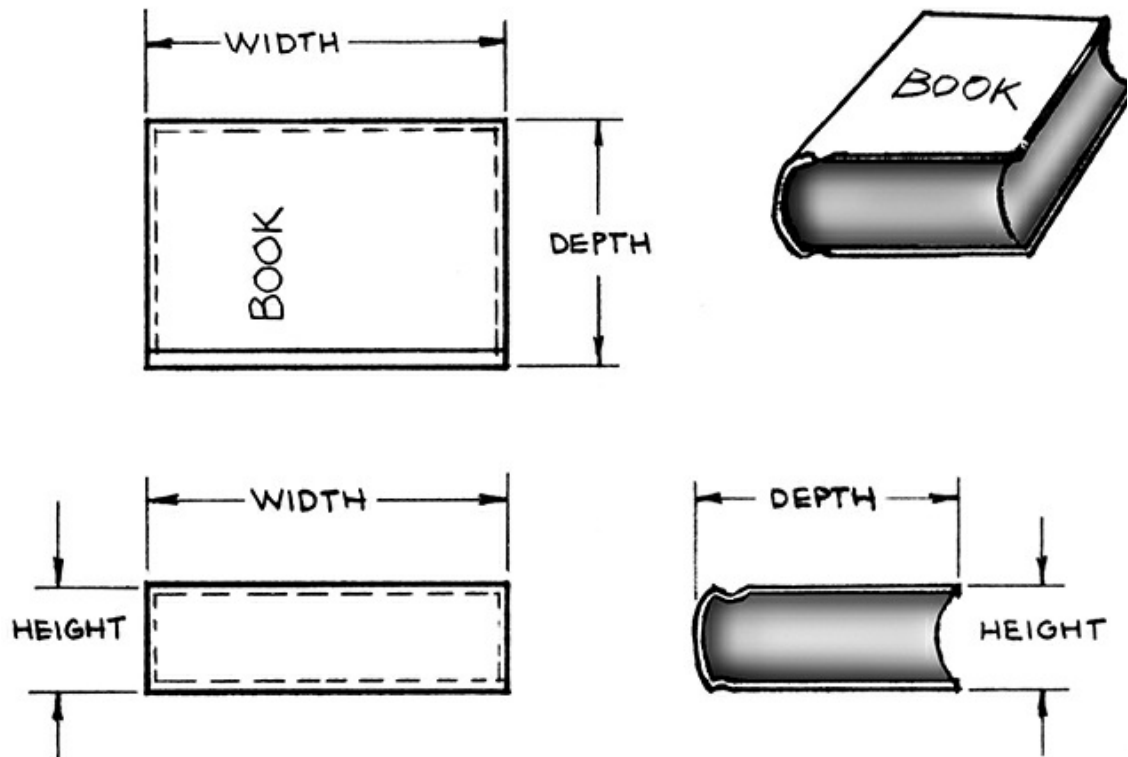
Here are the top, front, and right-side views of a book together with a pictorial view. Note that dimensions have been added to these three regular views. On a finished drawing, the dimension labels would be replaced with corresponding measurements made of the actual book.
